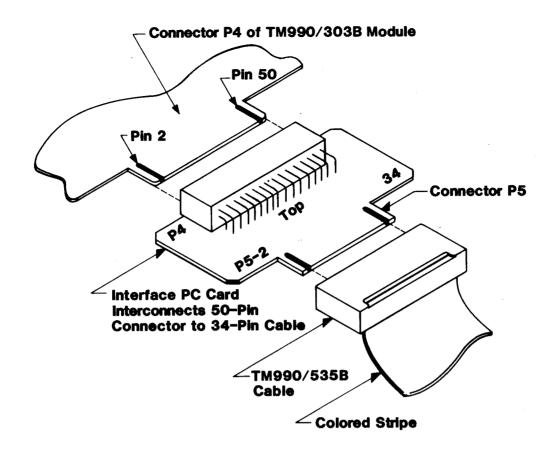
CONNECTING TM 990/535B DISK DRIVE CABLE TO P4 OF TM 990/303B MODULE
